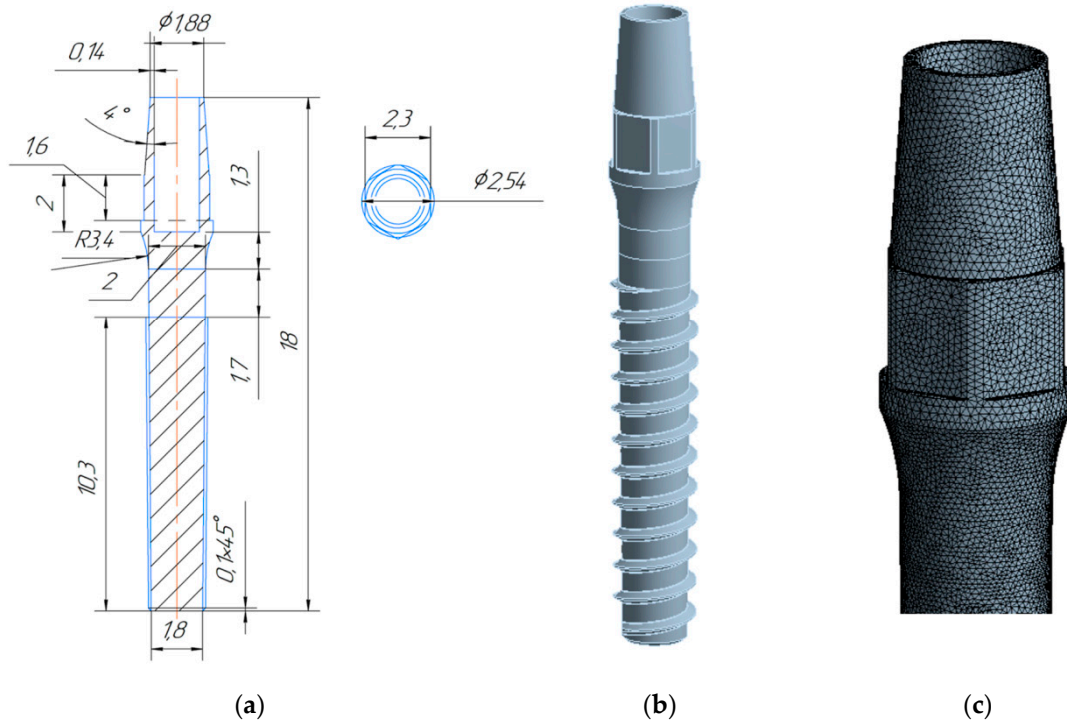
Geometry of the dental nanoimplant: (a) technical drawing with dimensions in mm; (b) 3D model; (c) enlarged FEM mesh.
